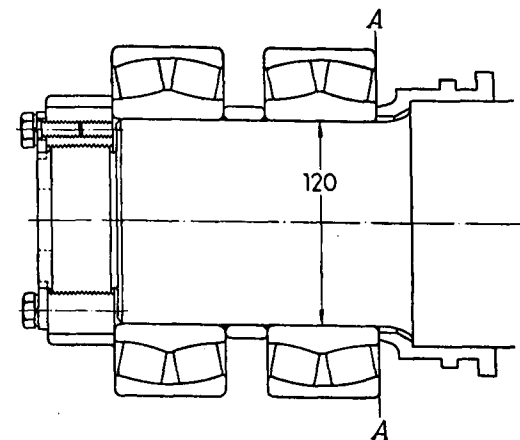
Axle bearing arrangement incorporating spherical roller bearings. U.I.C. 120 mm. journal. Bearing dimensions: $120 \times 205 \times 68$ mm.
